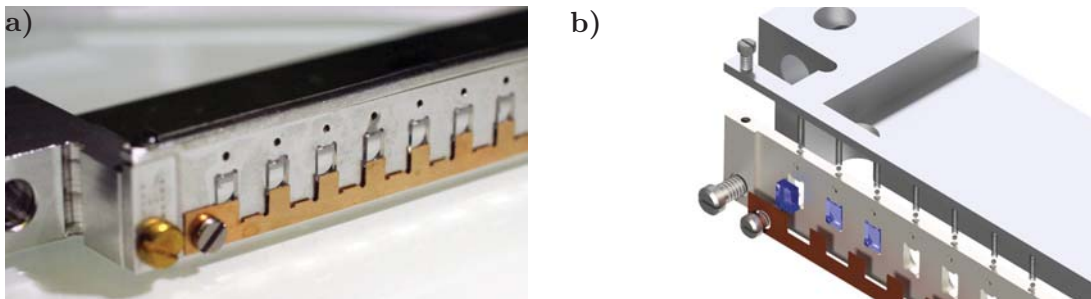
The substrate holder. a) shows a photo of the assembled mirror holder with the substrates before sending it for coating. b) is a CAD illustration of the holder assembly.
